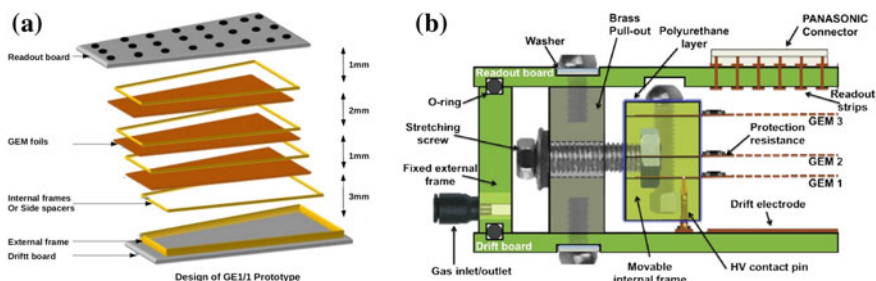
a Basic sketch of GEM assembly and its components b Foil stretching mechanism [3]
